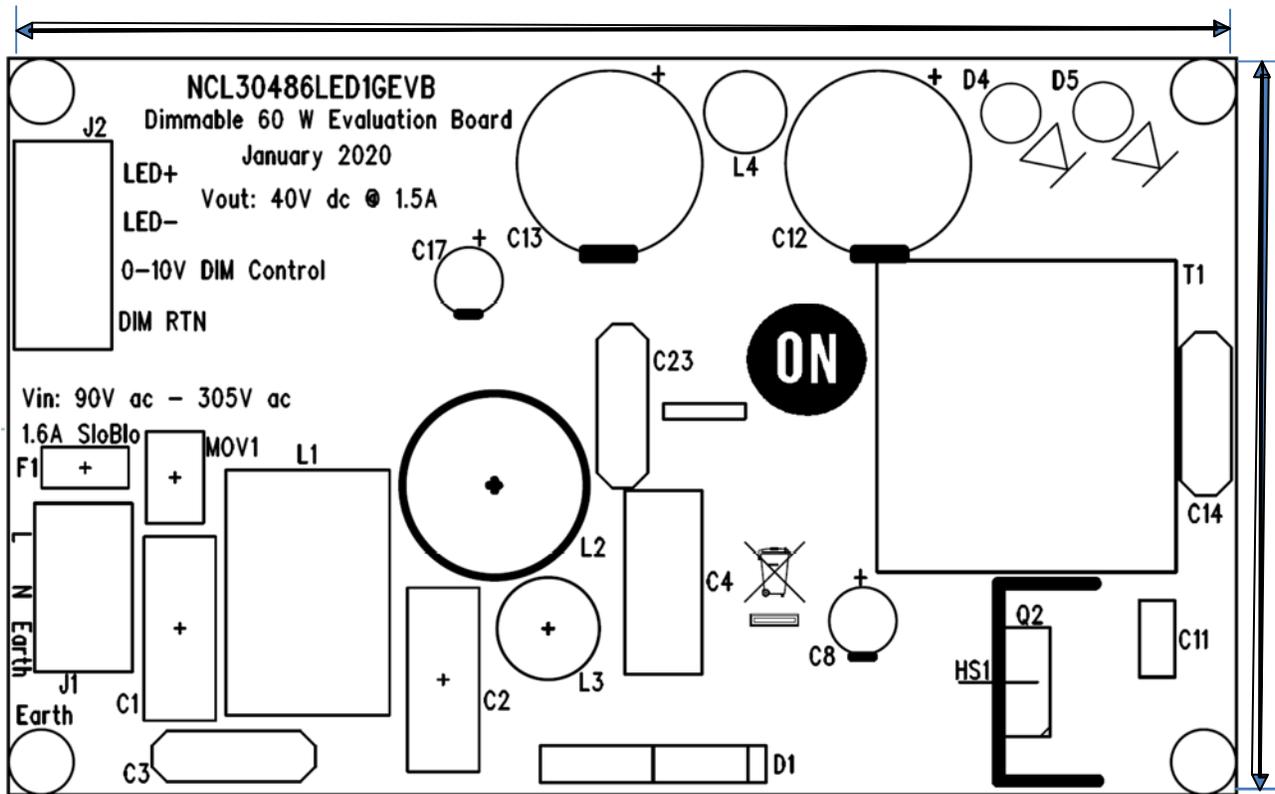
PCB Outline and Top Silkscreen (120 mm x 72 mm)
